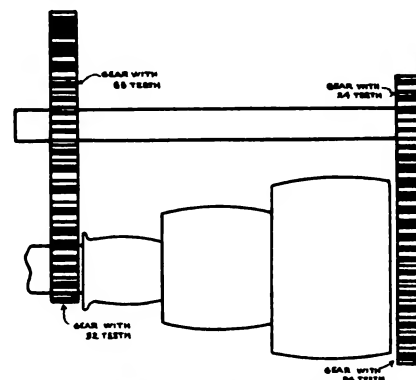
AN EXAMPLE IN CONNECTION WITH BACK GEARING
